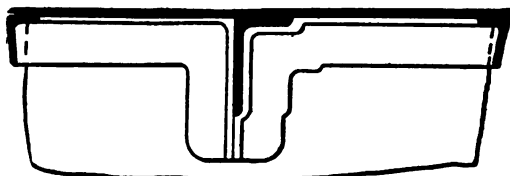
WATERTIGHT STRAPLING AROUND ANGLE FRAME.
